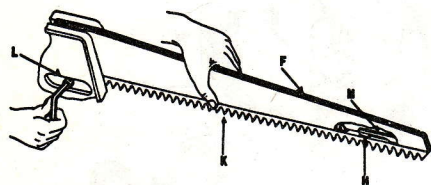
Wright saw blade and guide showing principal components. Guide keys (H) are spot welded to guide (F) on inside of blade slot.
